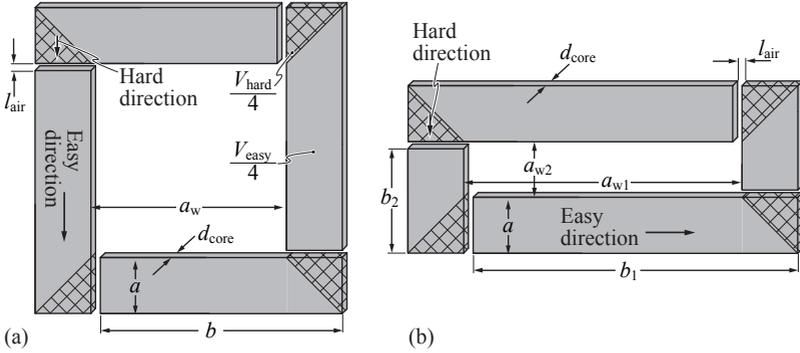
Setup of a PCB-integrated core with (a) quadratic outline and (b) rectangular outline.
